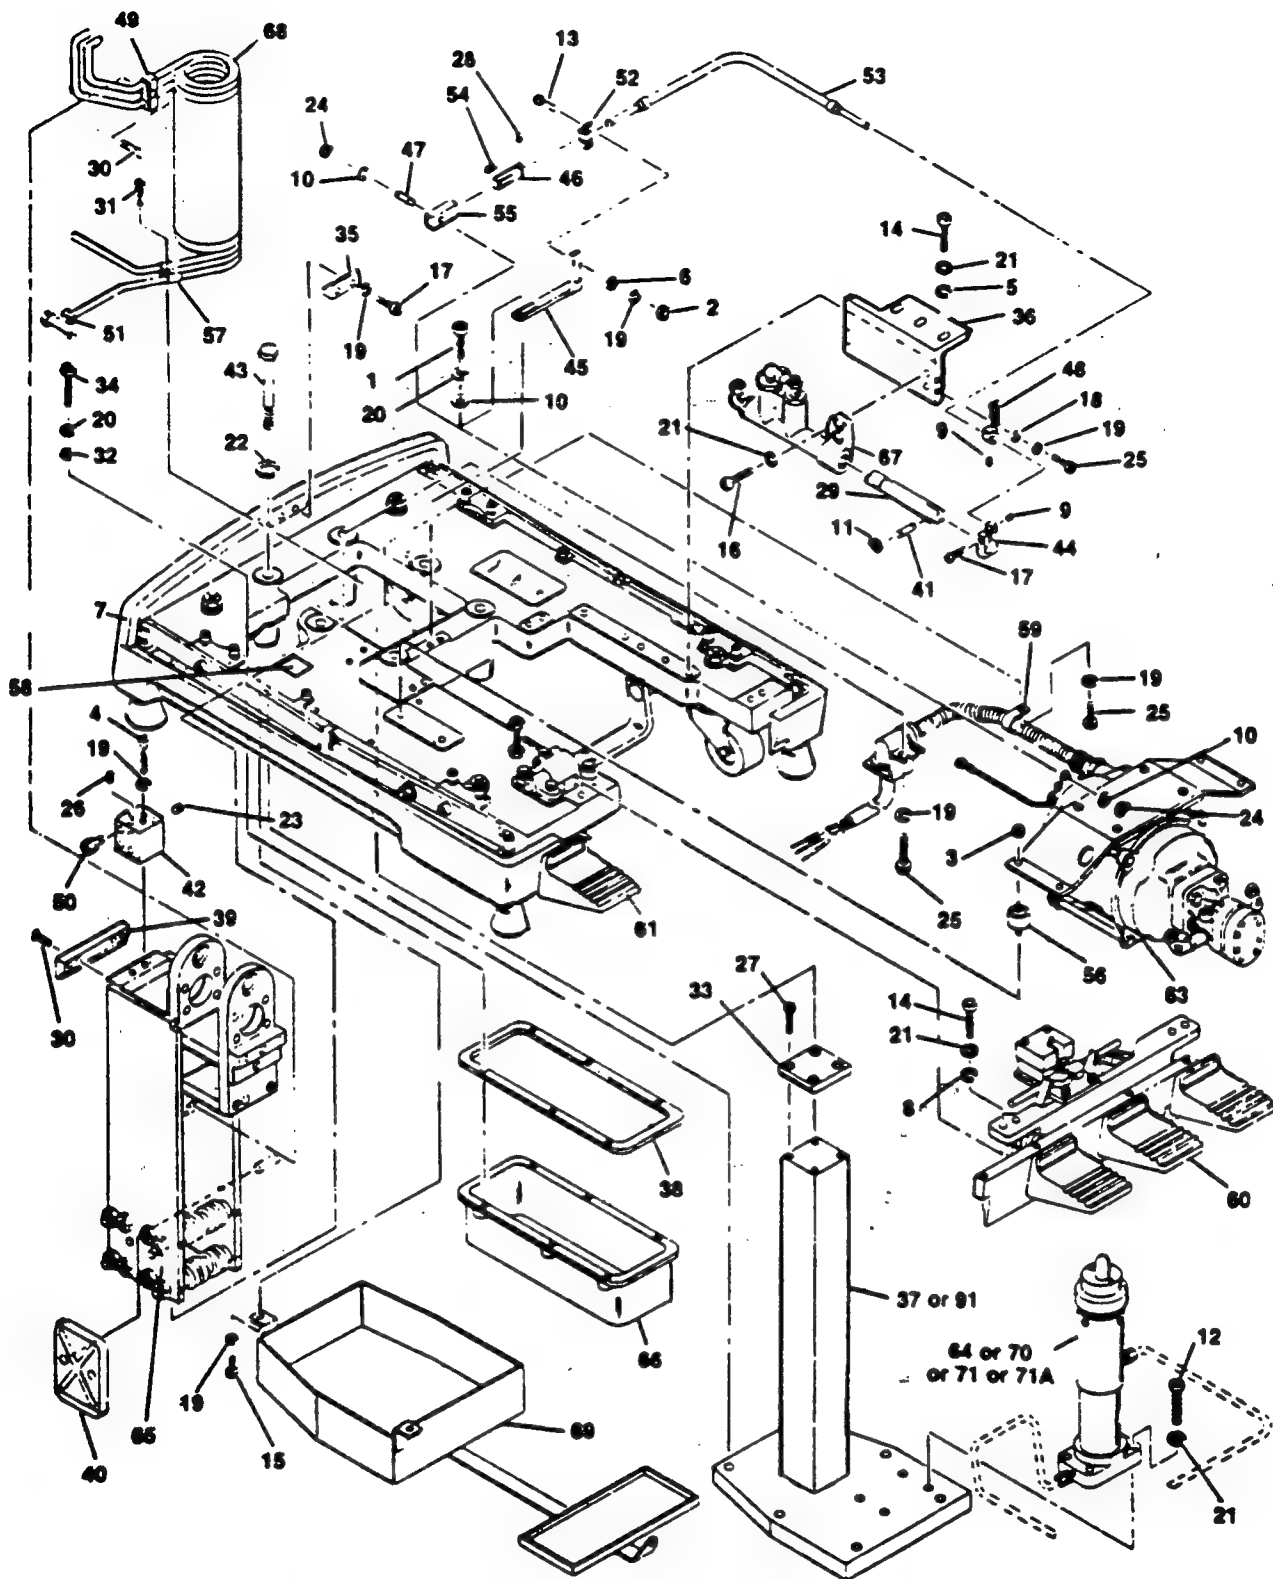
2080L AND 2080 COMPAT BASE ASSEMBLY. Sheet 1 of 2
